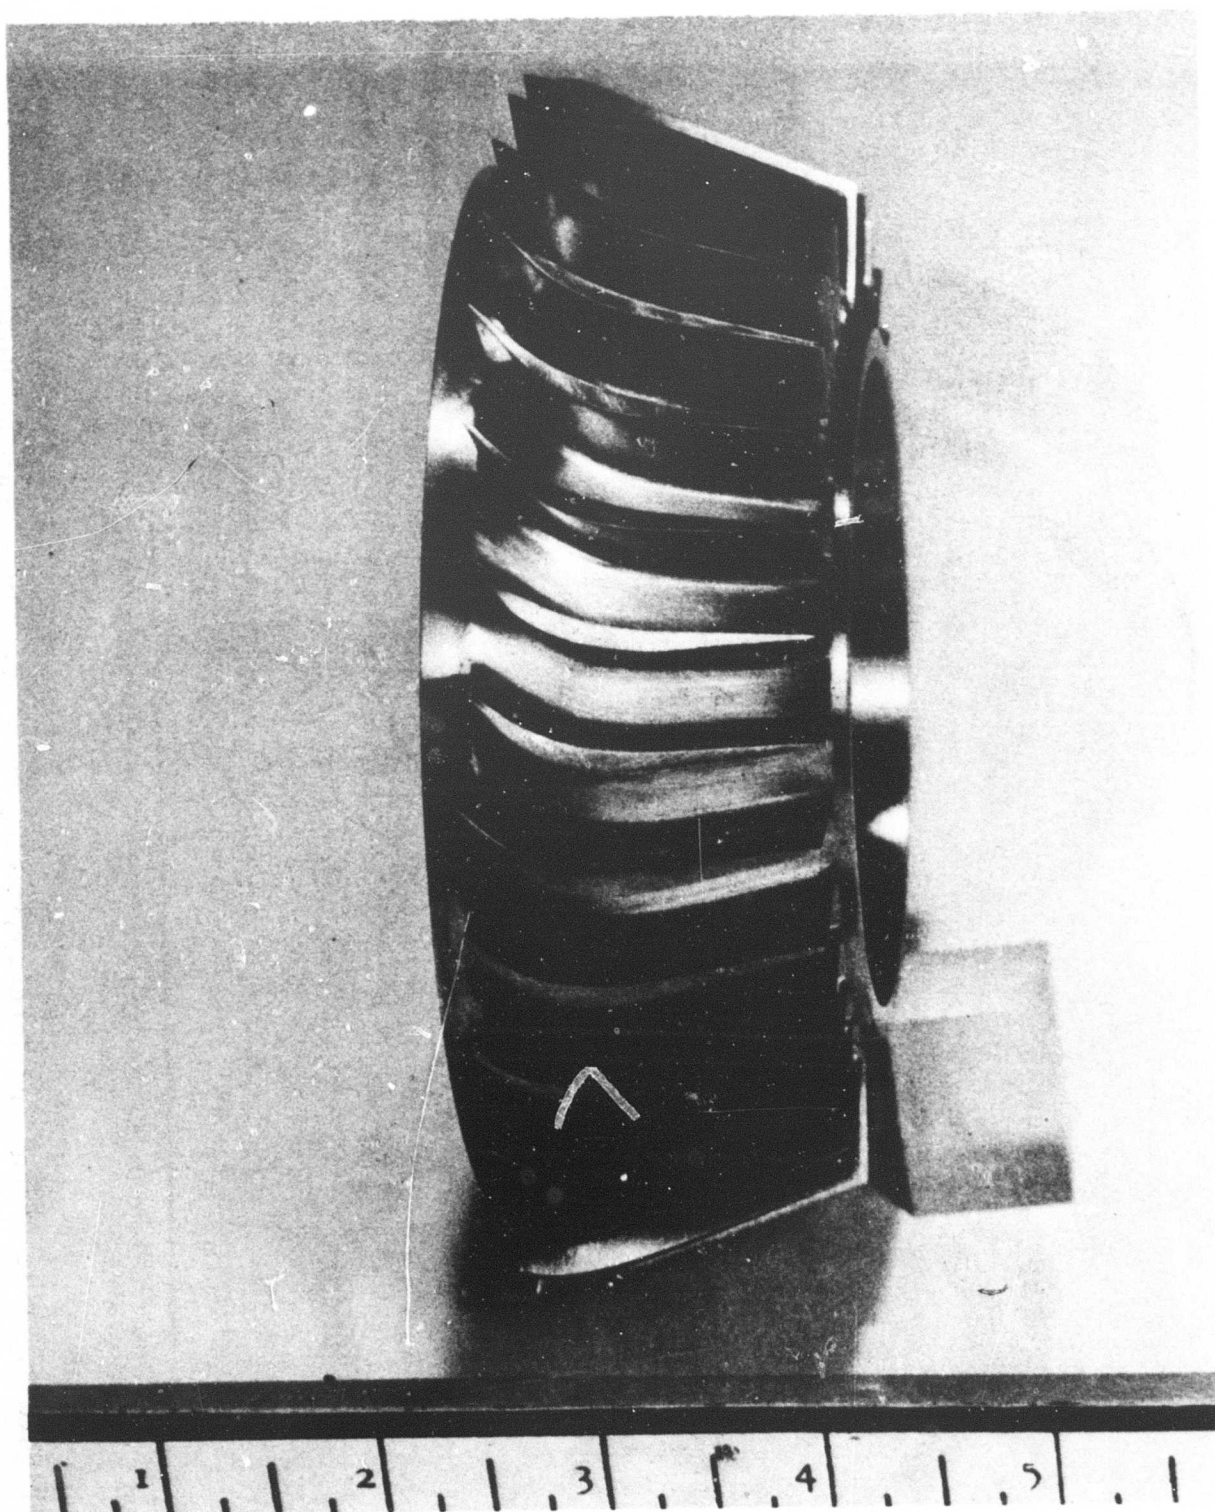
Exit Stator Vanes and Inner Shroud - Side View
